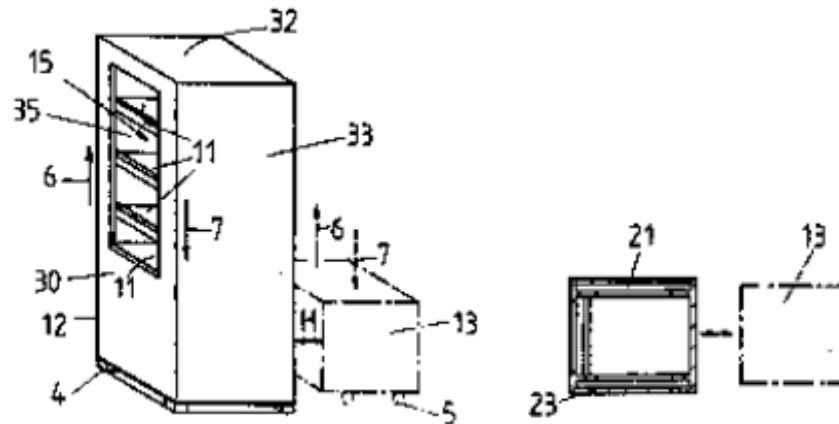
Drawing of patent Refrigerated display cabinet, (12) – frame, (15) refrigerated area, (33) - lateral wall, (32) - top wall, (30) – open front, (13) – cooling unit, (21) – outlet guide located on the first lateral wall, (23) – air inlet guide located in the second lateral wall (6),(7) – direction of air, (11) –shelves [B.11.A]
